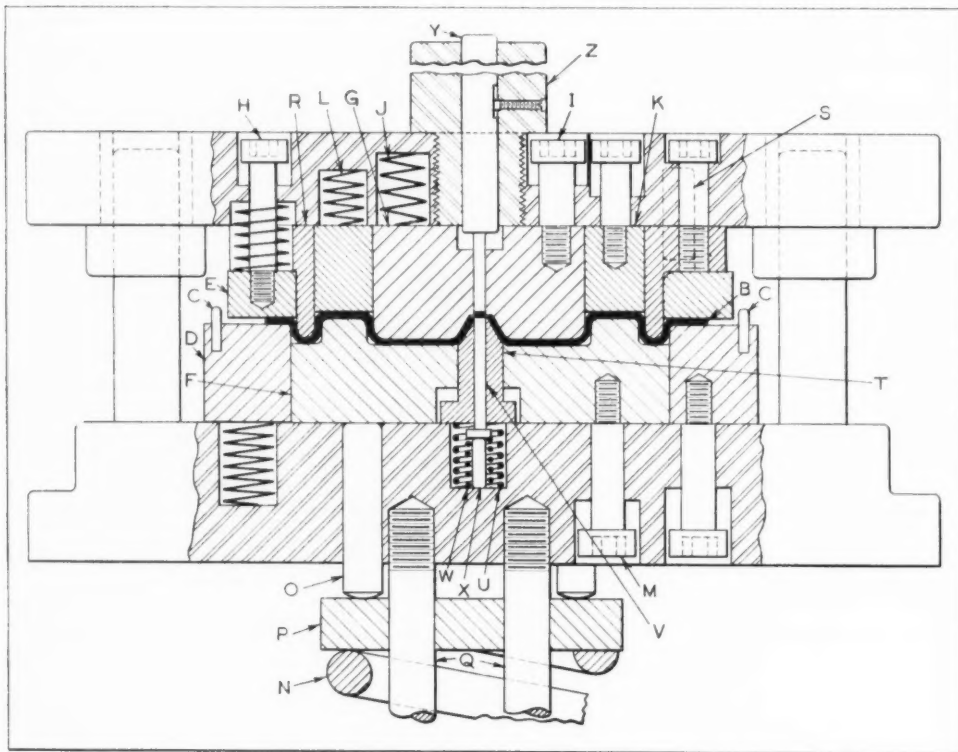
Forming and Piercing Die in Closed Position with Work Shown at B
